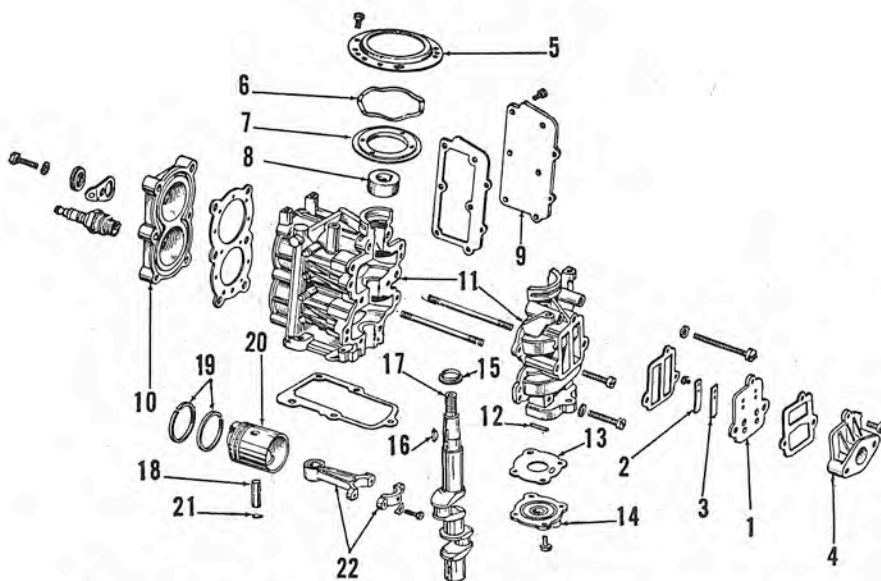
Exploded view of series JW power head assembly and reed valves.
